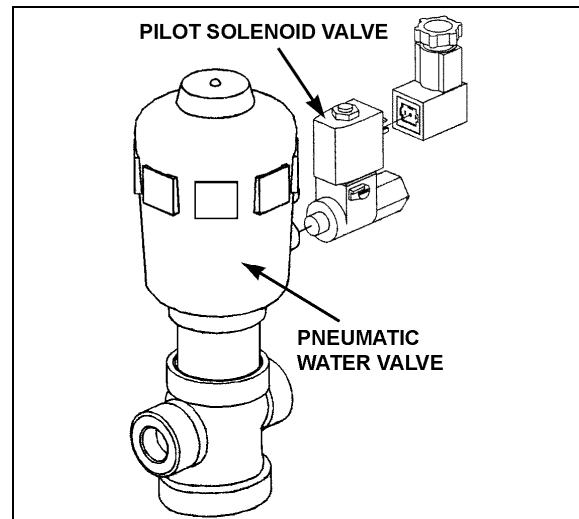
CENTRAL HOT WATER PNEUMATIC VALVE ASSEMBLY
